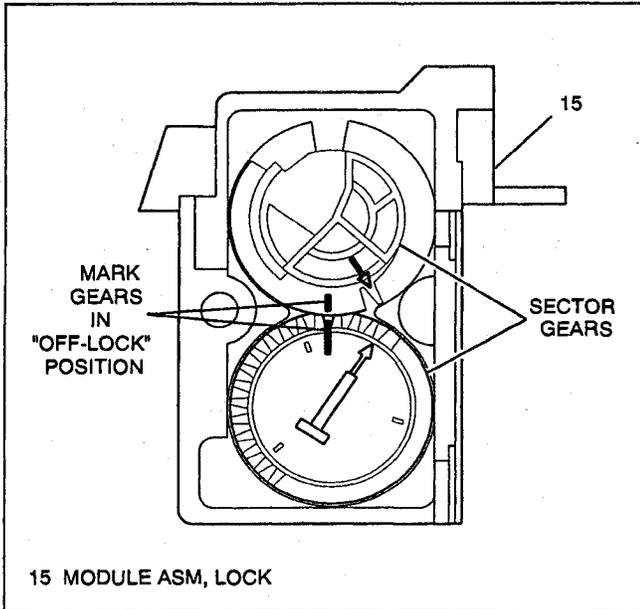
Sector Gear Timing Position (OFF-LOCK)
